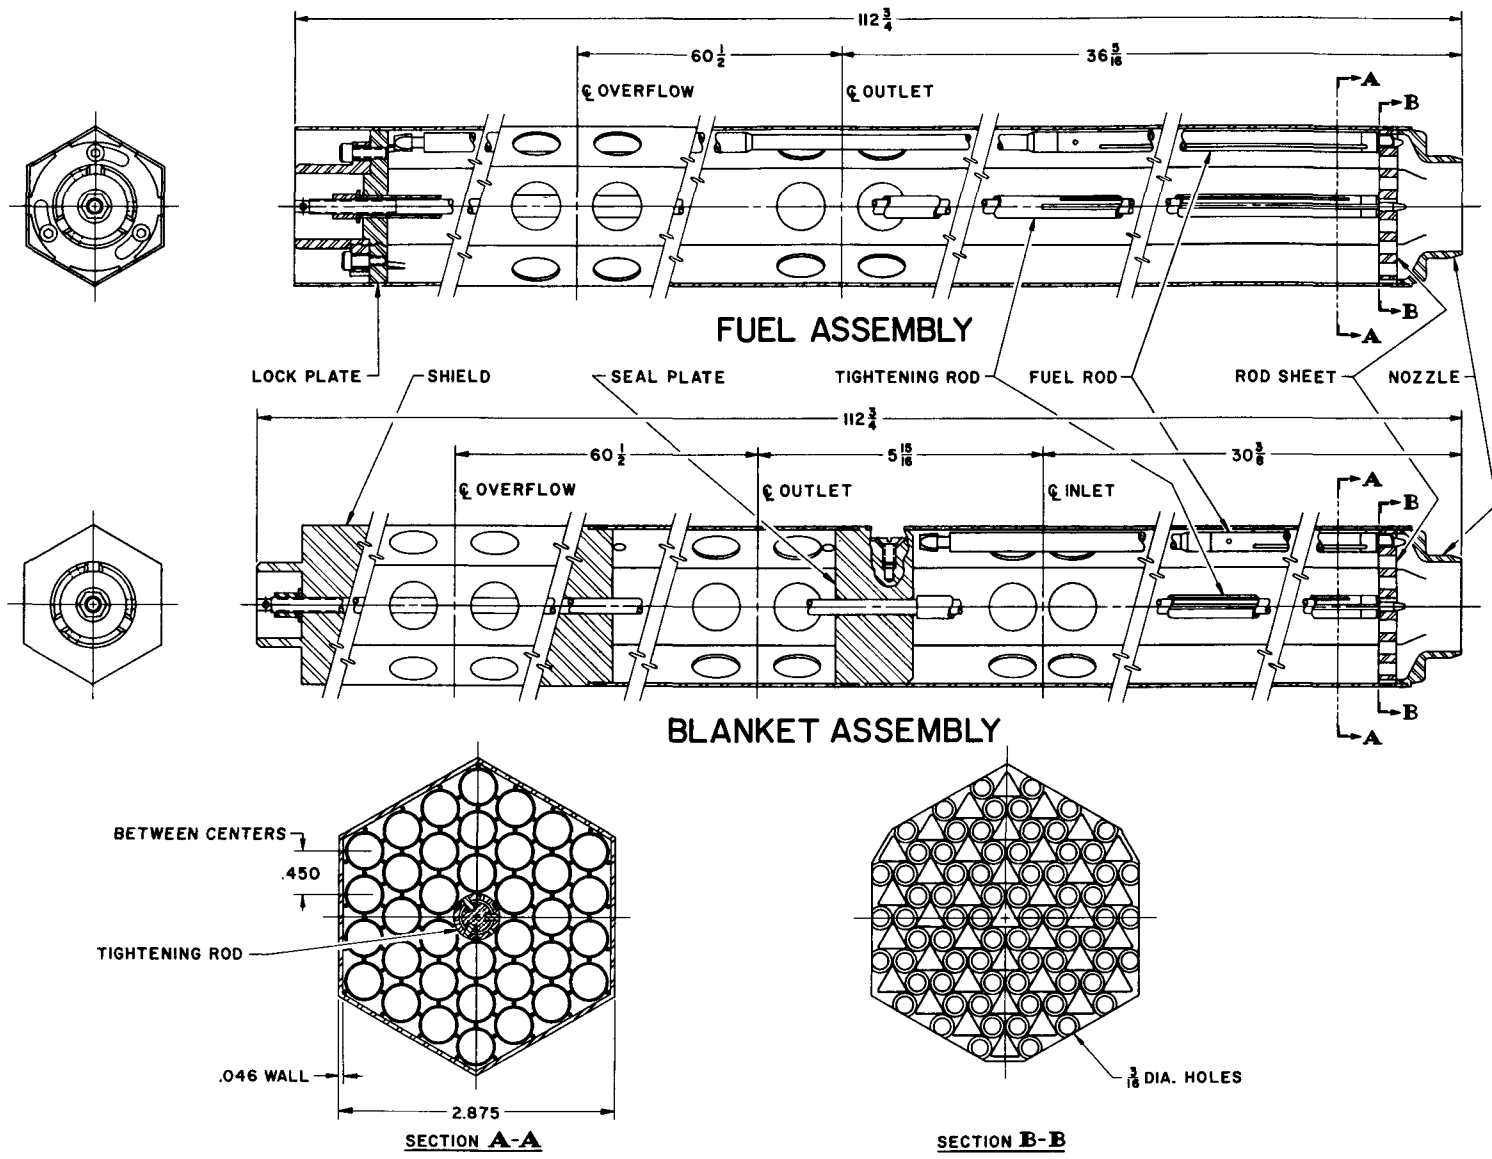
Fuel and Blanket Assemblies, EBR-I, Mark III
